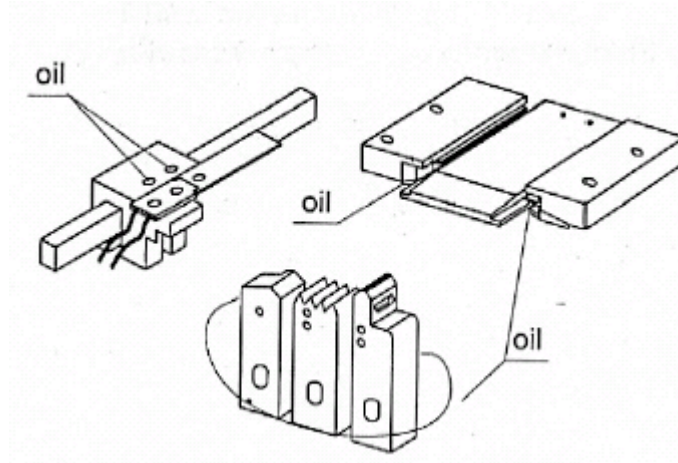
Saturn® ST-2200, Lubrication points (slide plate, heater slide, welding press, cutting gripper, and holding gripper)
